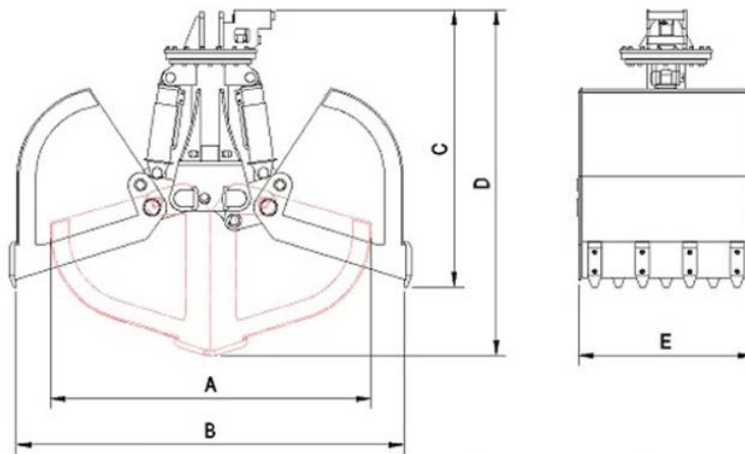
Examples of typical clam-shell bucket dimensions and load capacities.
